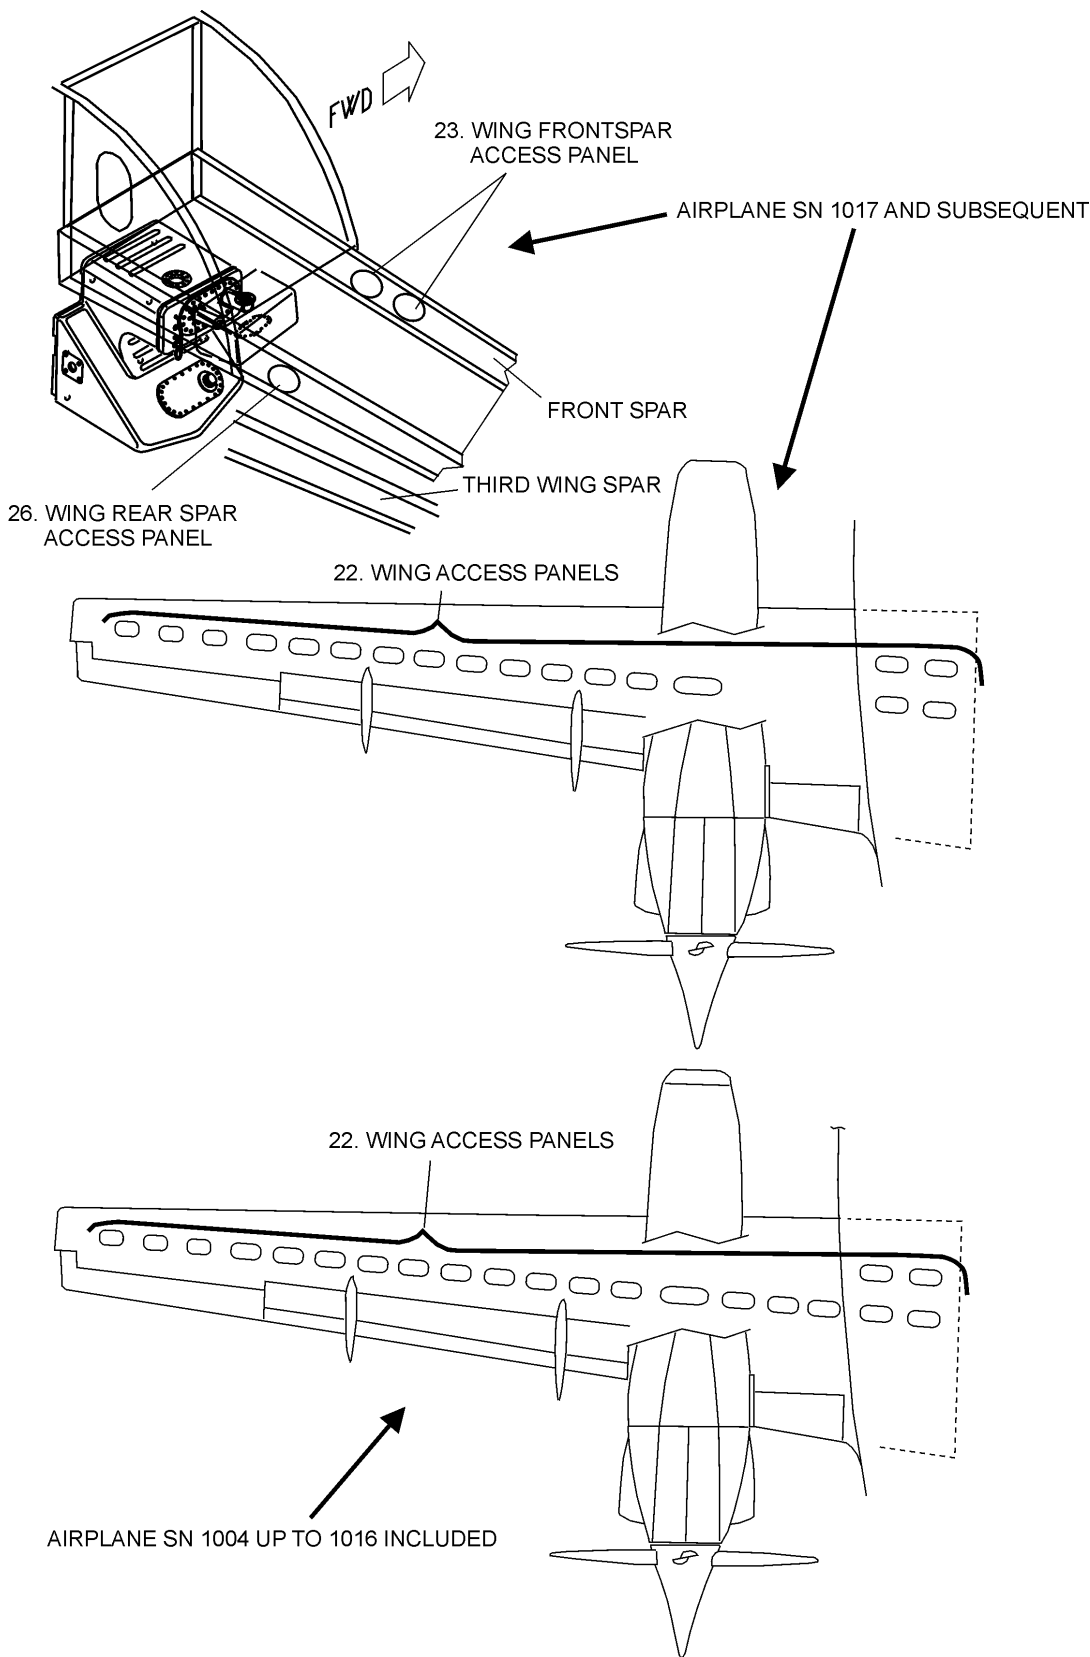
Fuel Tanks Access Panels and Components - Leakage Check (Sheet 5 of 6)
